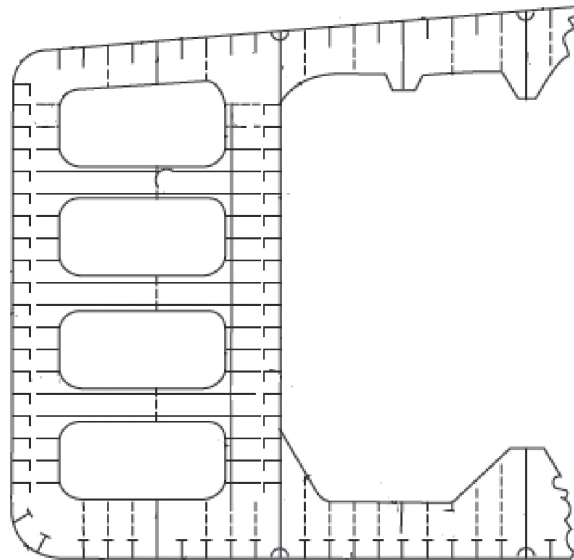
Typical transverse section of a single-hull oil tanker
